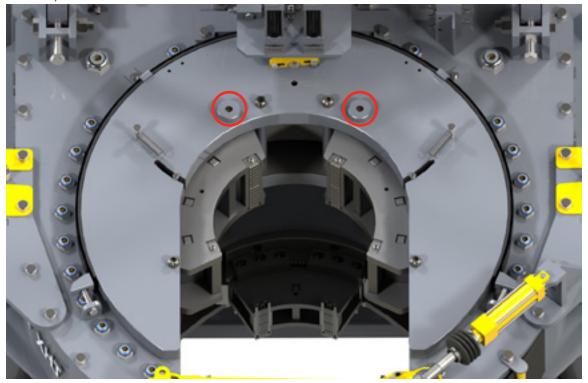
Jaw Pivot Bolt Lubrication
